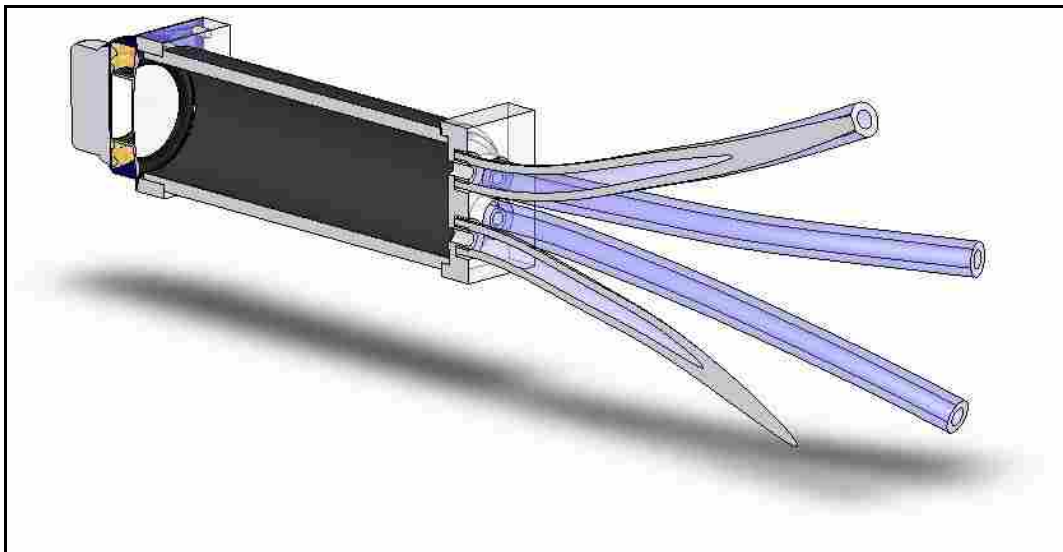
Sectional view of CAD assembly model with the receiver tubes connected to the splitter
